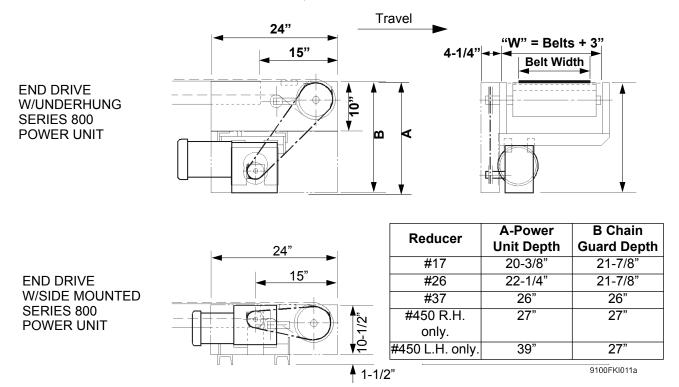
Series 800 End Drive Unit Components and Power Unit
